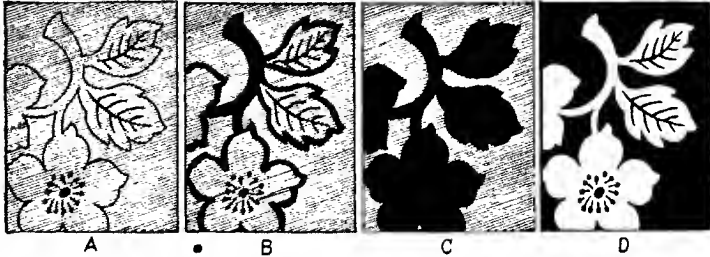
A, As engraved on roller and ruled ready for painting. B, showing outline painted ; C, painting completed ready for etching ; D, etching completed and roller cleaned
